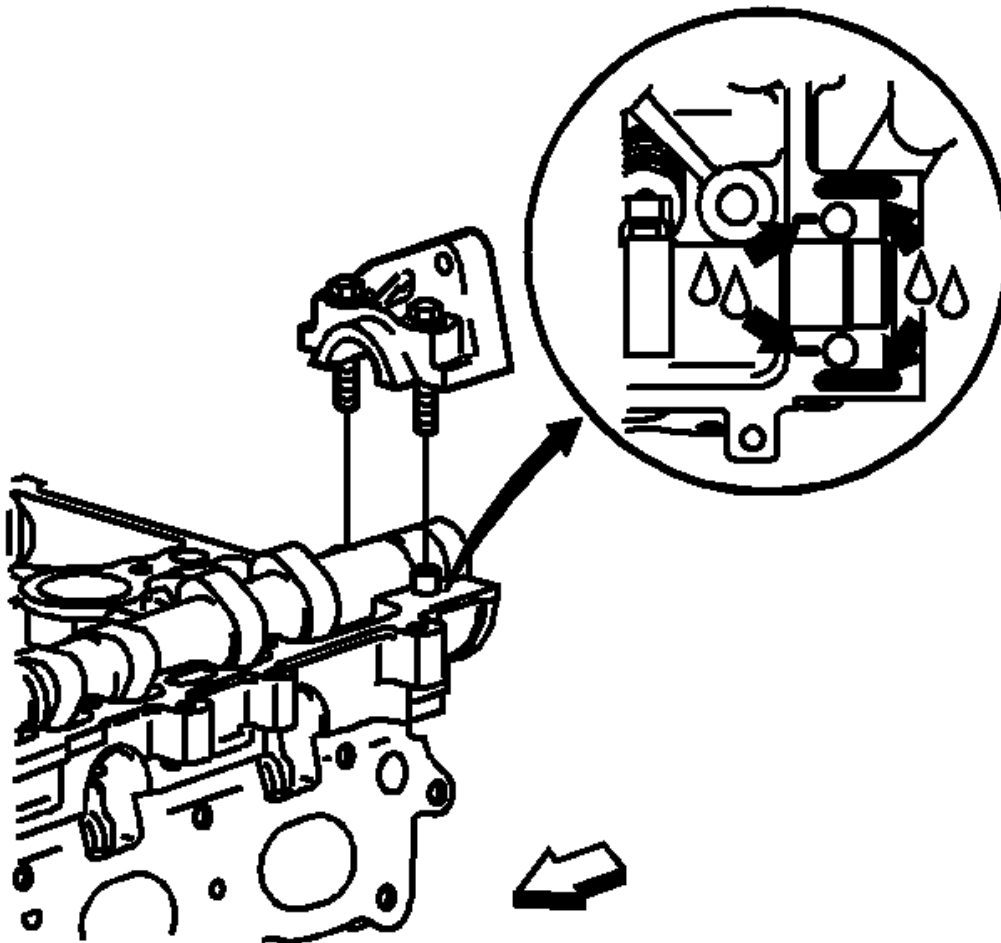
Applying Camshaft Bearing Cap Sealer To Rear Cap
